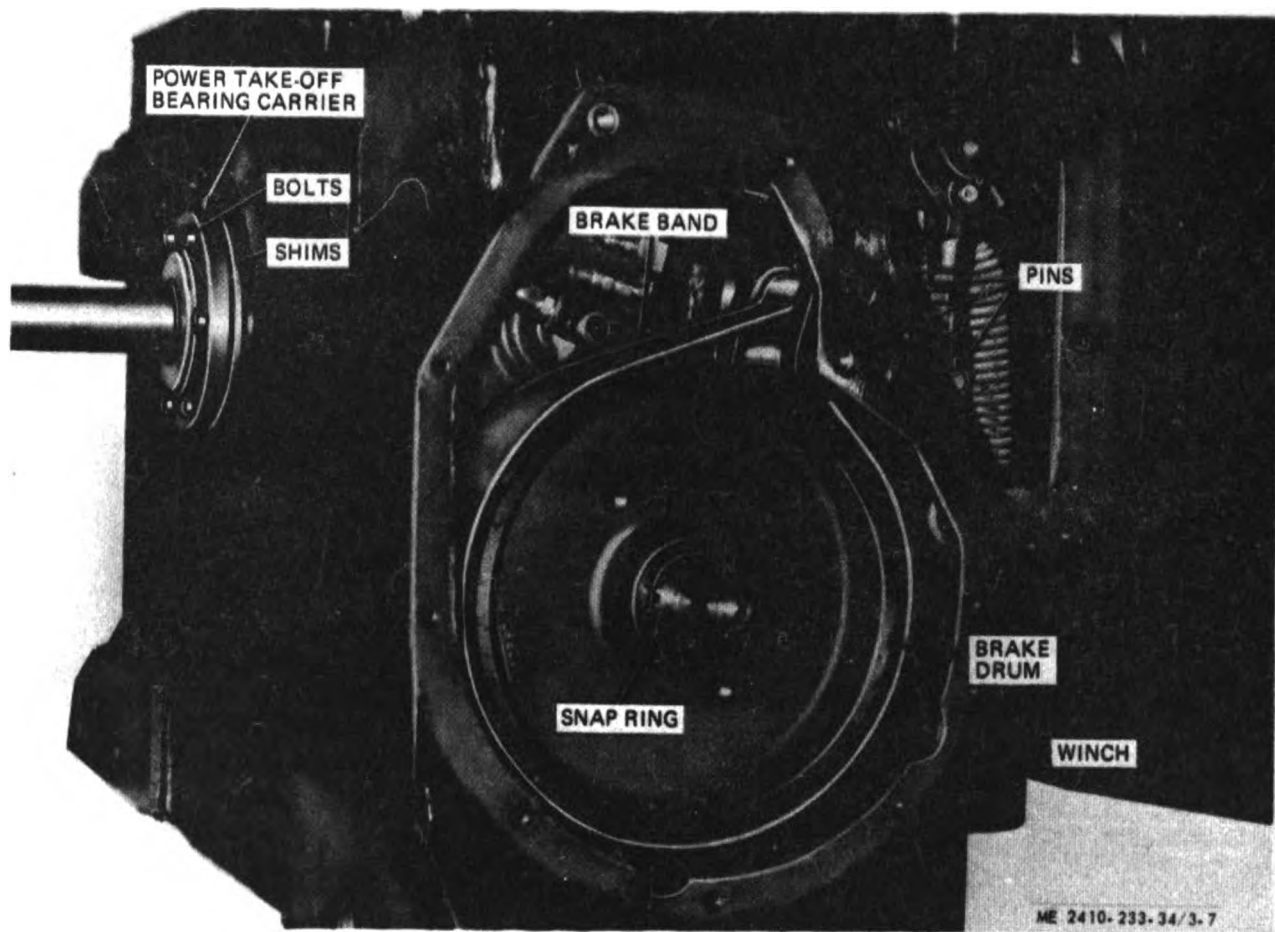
Power take off bearing and brake drum, removal and installation.
